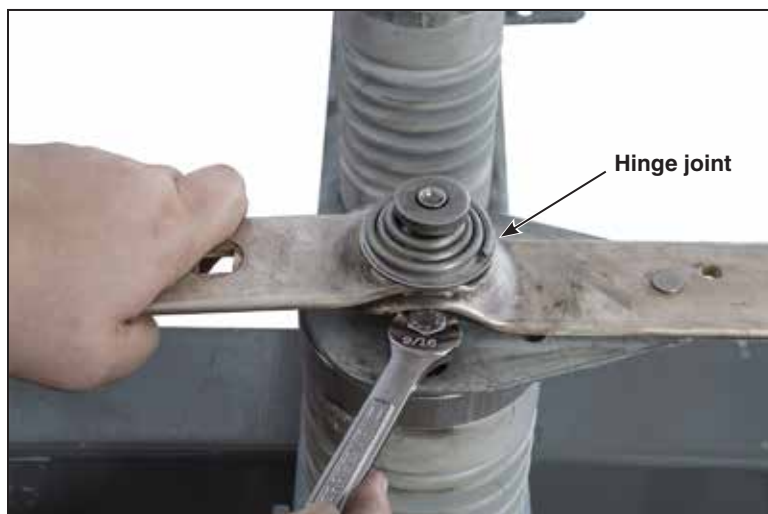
Install the new blade onto the threaded holes on the spacer adapter.
